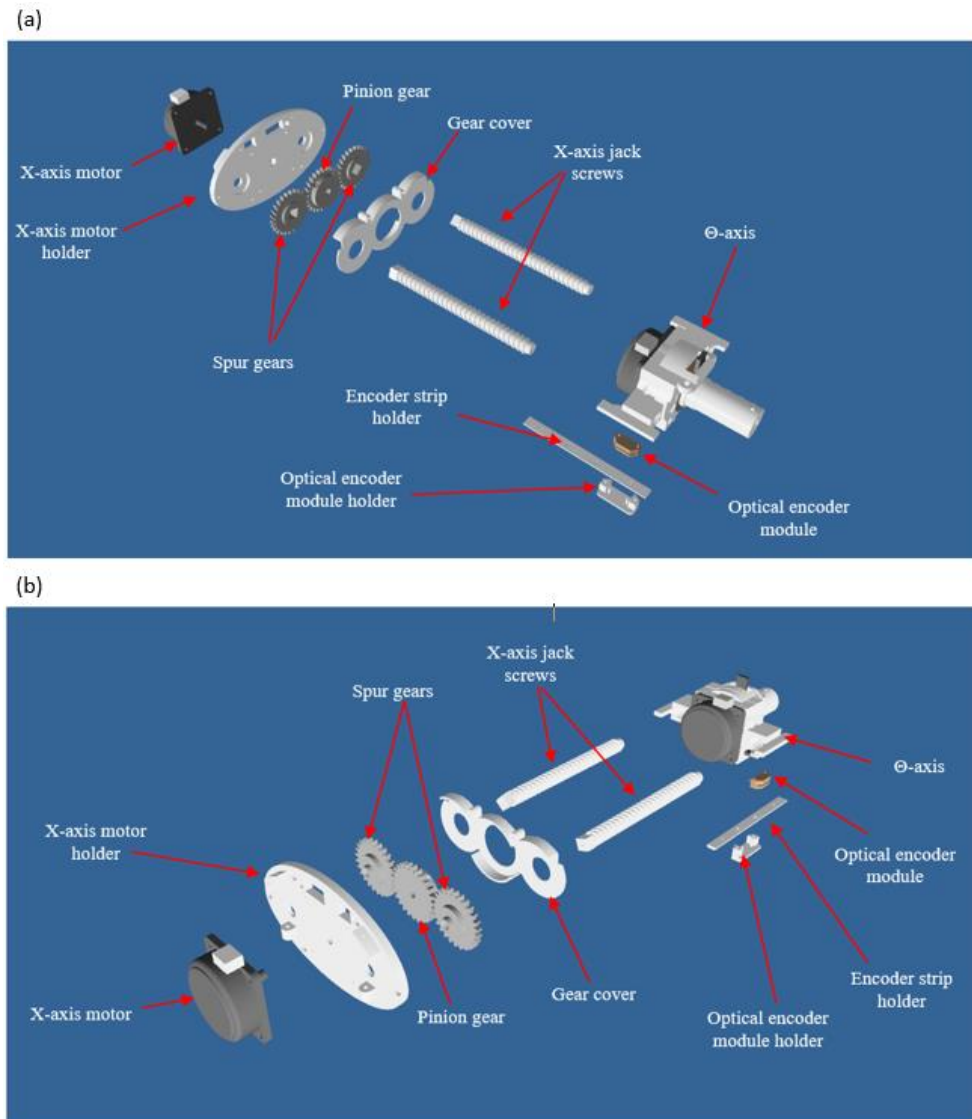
a) Front exploded view of the X-axis, and b) rear exploded view of the X-axis.
